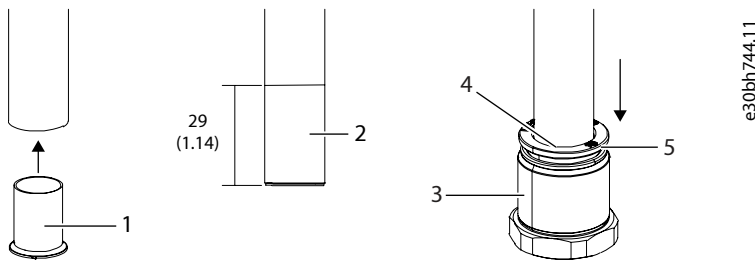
Inserting a Pipe into the Cooling Circuit Connector, mm (in)
